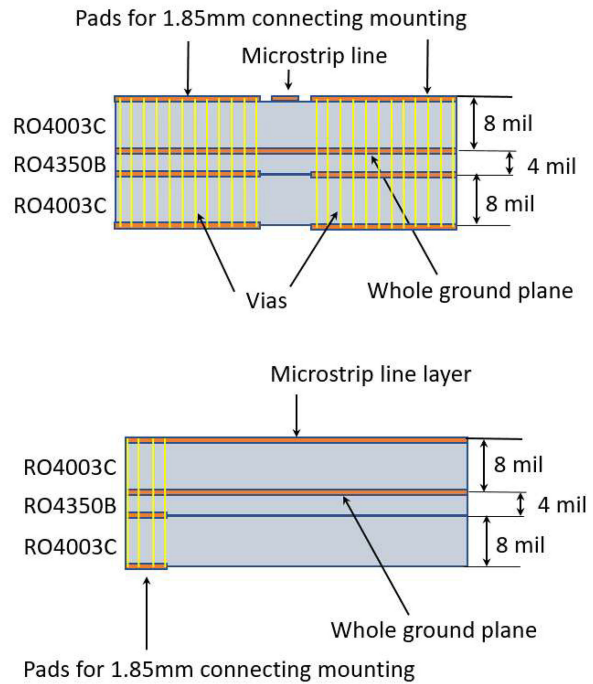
Front view (top) and side view (bottom) of 4-layer PCB stack structure
